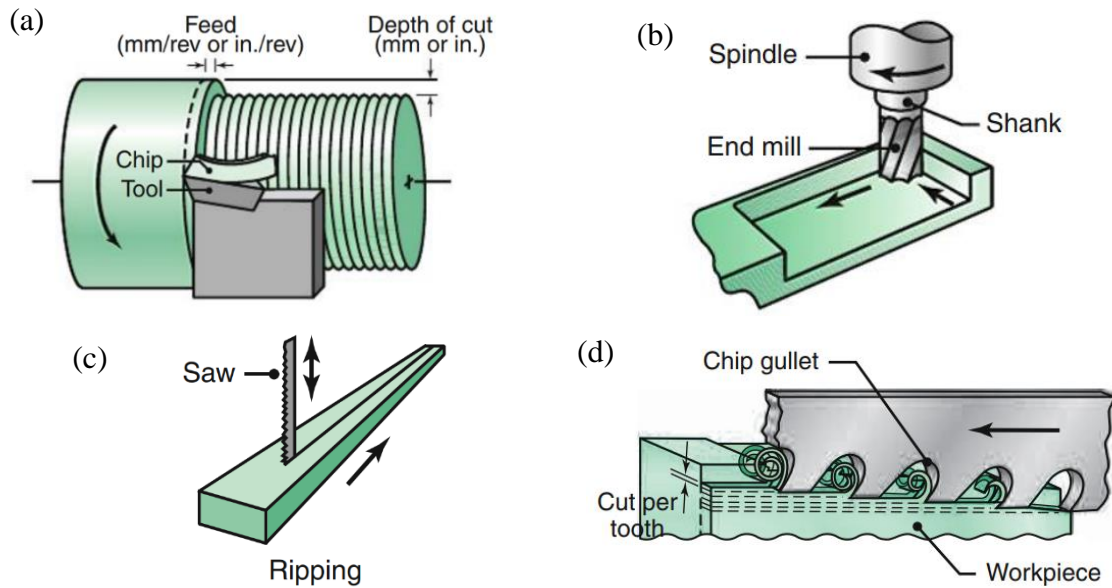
Schematic illustration of some machining processes: (a) turning, (b) milling, (c) sawing and (d) broaching [11].
